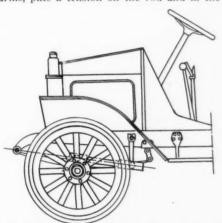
Steering Gear Back of Axle and Drag Link Parallel With Frame Center line of drag link produced intersects center of front spring bolt
